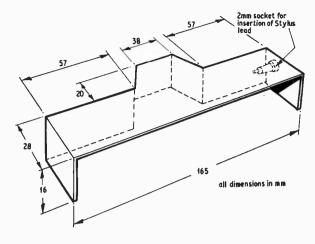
Dimensions of the keyboard cover which was made from 3mm card
